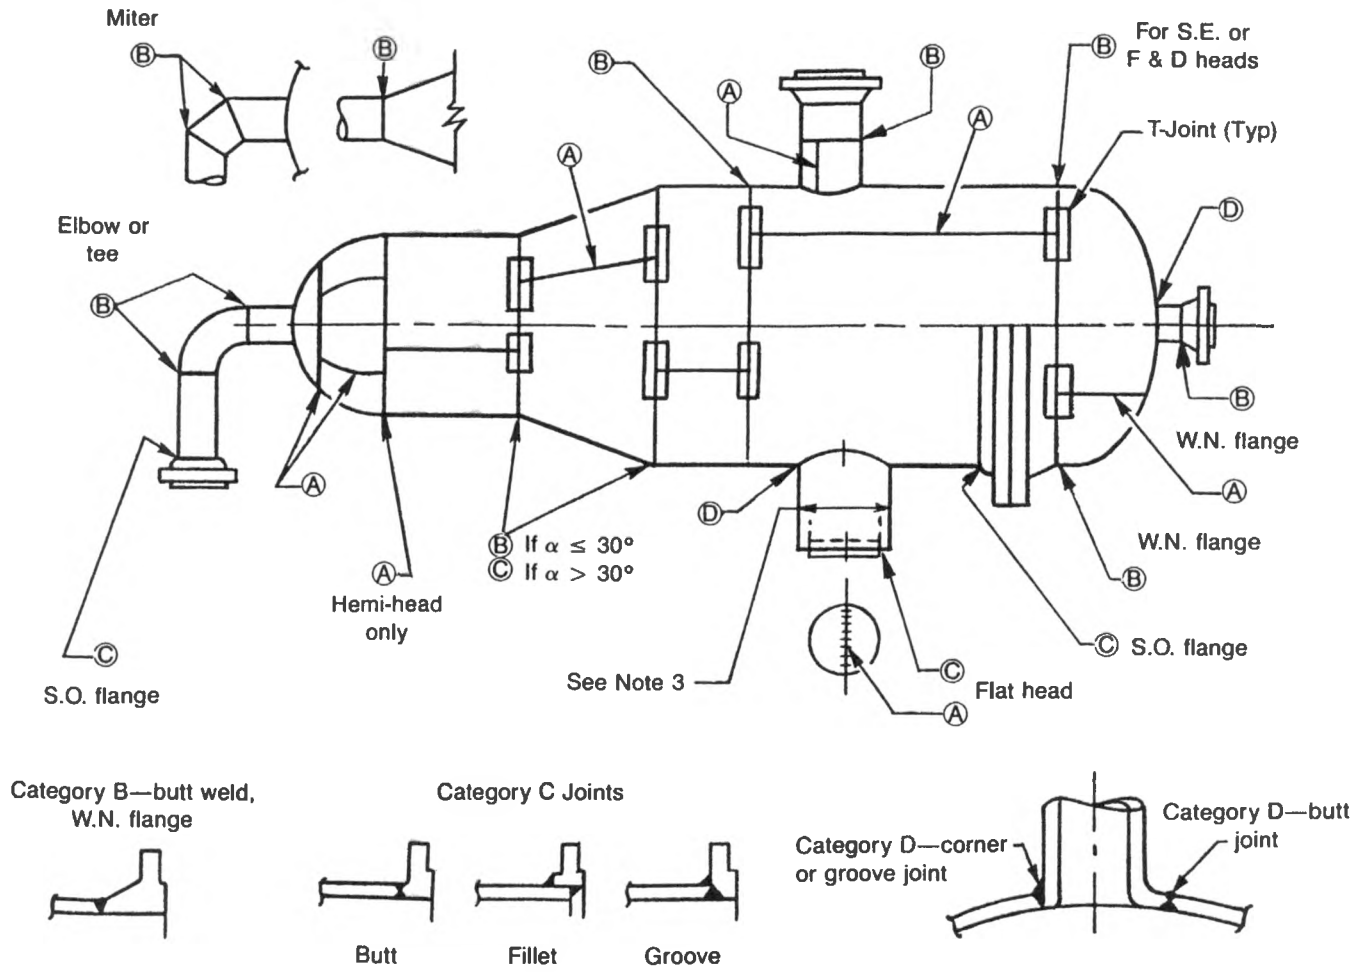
Categories of welded joints in a pressure vessel.
